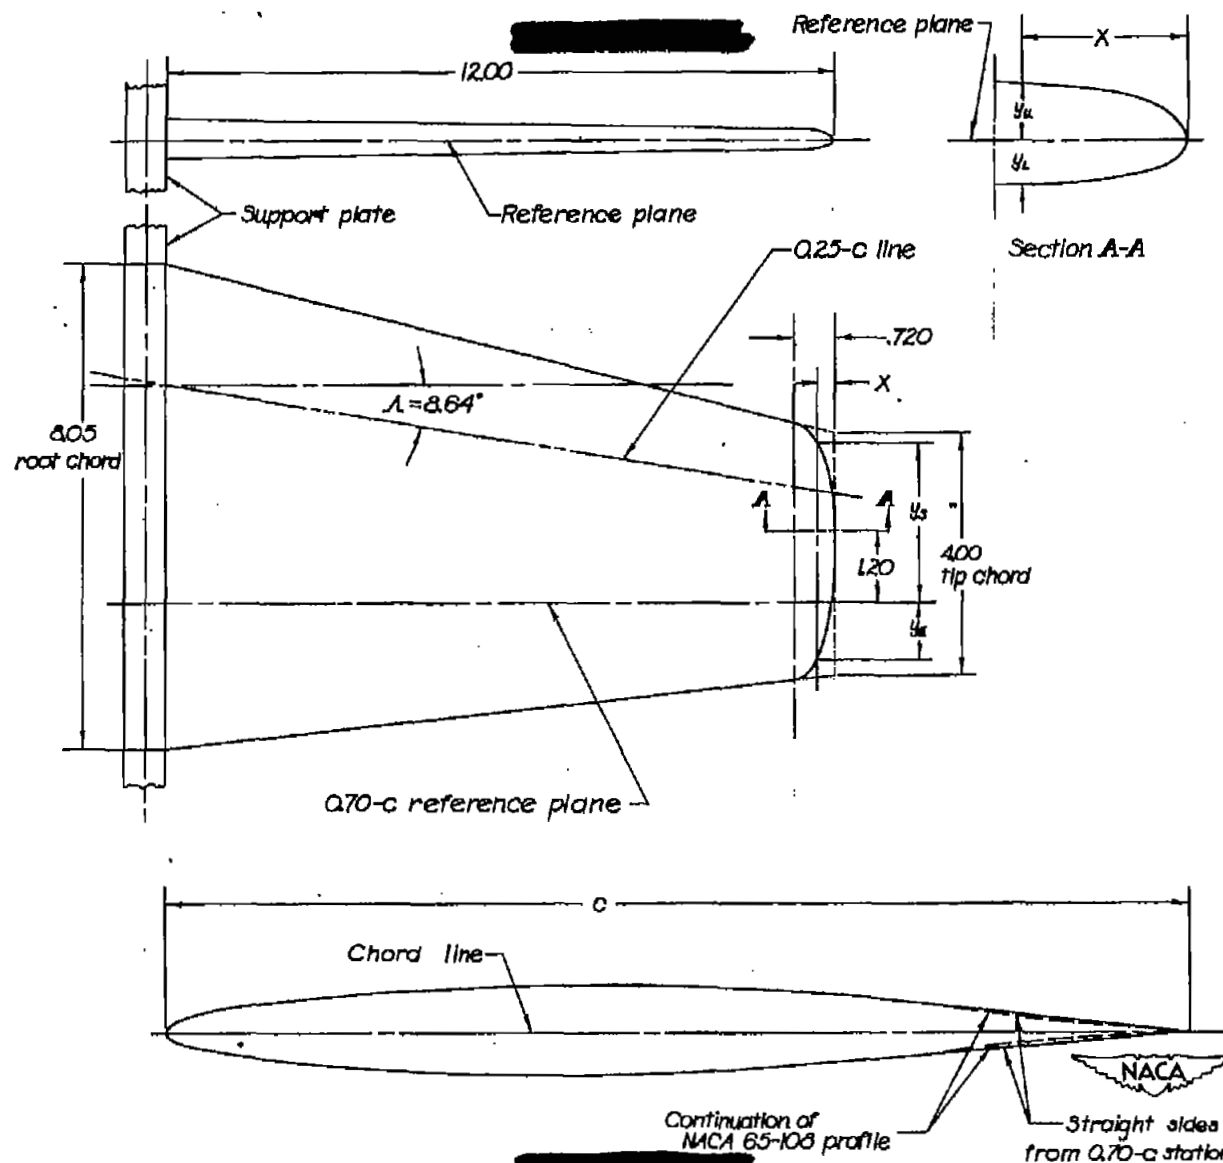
Details of wing model tested. (Dimensions in inches.)
